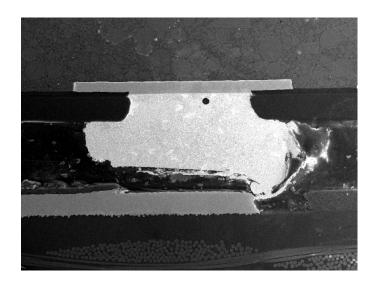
Underfill was Pushed into the Solder Paste, Causing Solder Joint Failure
